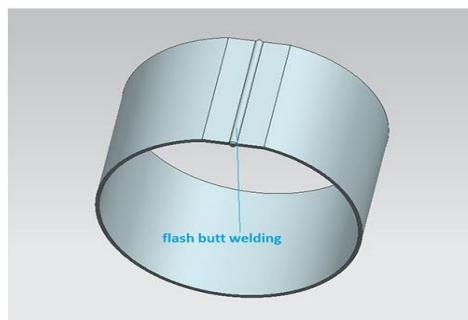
Design of welded and conformed steel plate, source: LittleDuck, wheelmachinery
